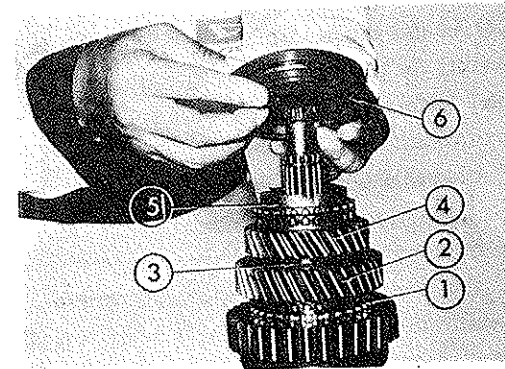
Installing 2nd Gear and Clutch Hub No.1
